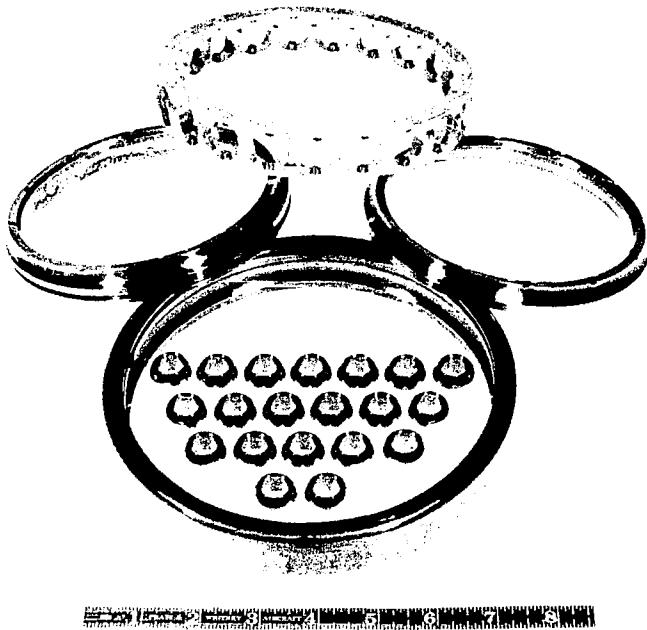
Overall View of Drilled-Ball Bearing S/N 2552A-2 After 25 Endurance Cycles
